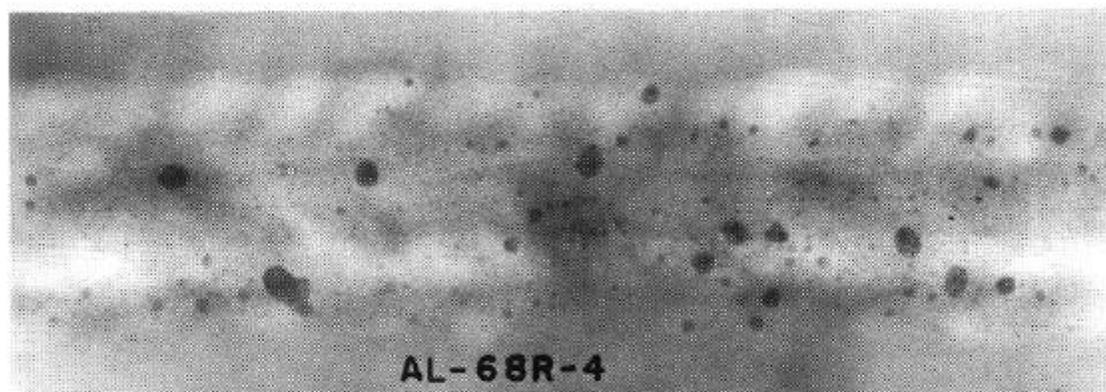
Reference standards for gas cavities in aluminum welds.
